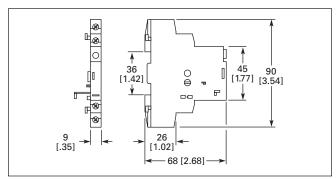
Trip Indicating Auxiliary Contact — XTPAXSATR... (Approximate Dimensions in mm [in])
